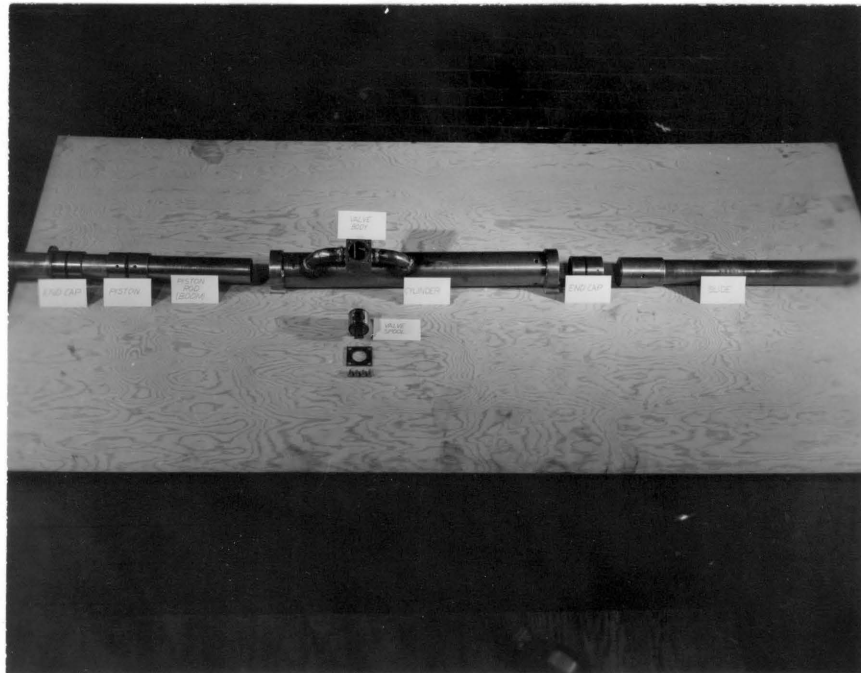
Damping Cylinder and Valve Parts in Disassembled Condition.
